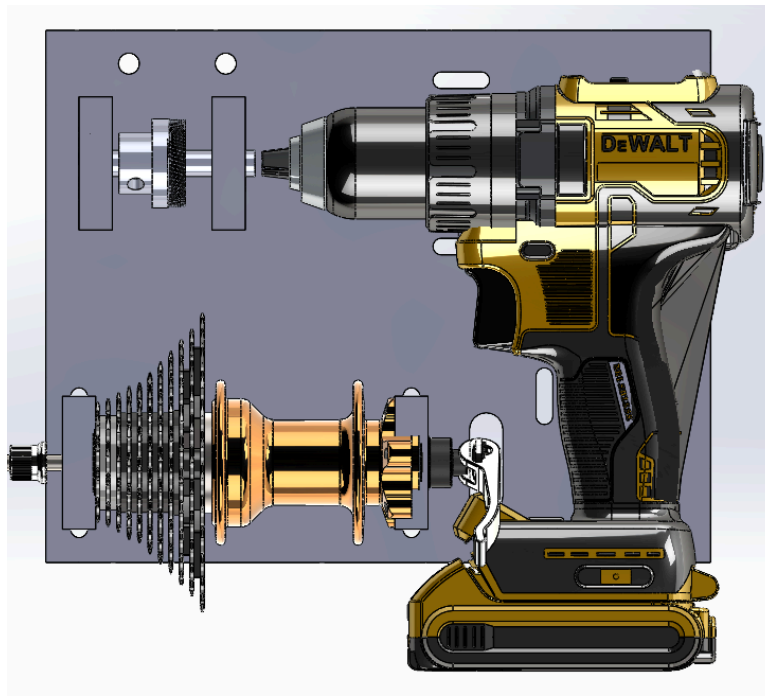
The drill plate with integrated hub, designed to emulate a gearbox and maximize torque output from the drill to the largest ring, and then from the smallest ring to the driven wheel's sprocket.
